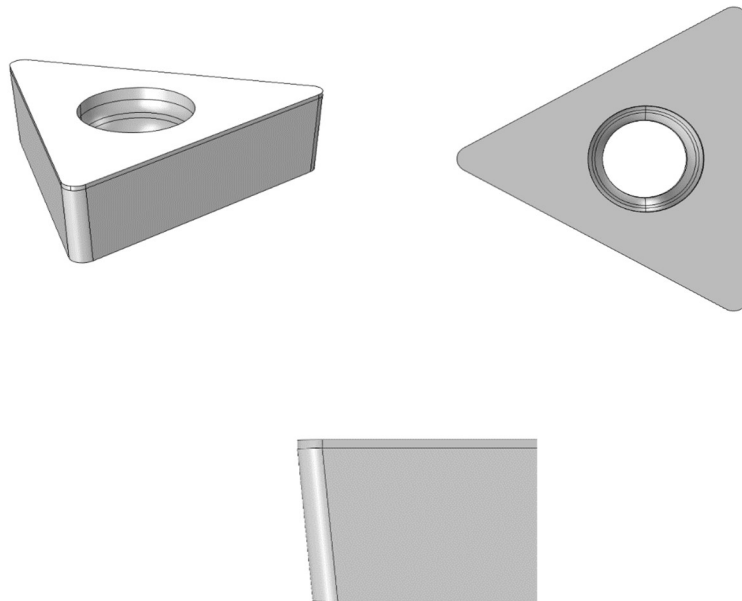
Geometry model of the cutting tool insert developed using SOLIDWORKS.
